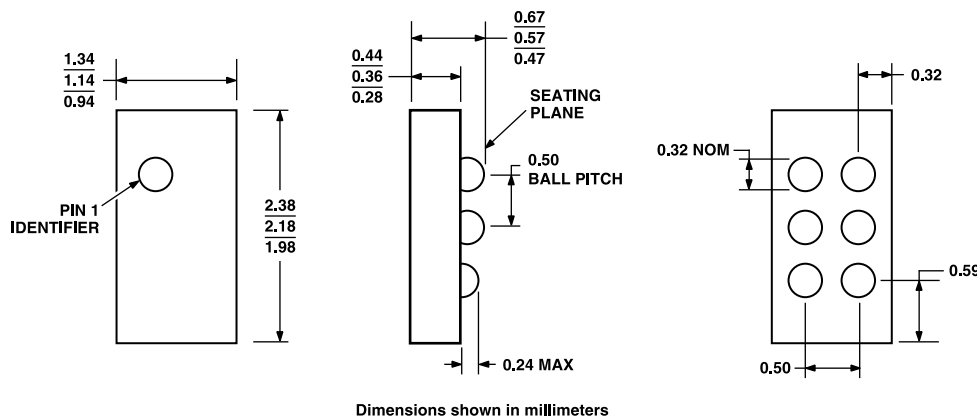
Typical Dimensions for a 3×2 MicroCSP Die (before Assembly)
